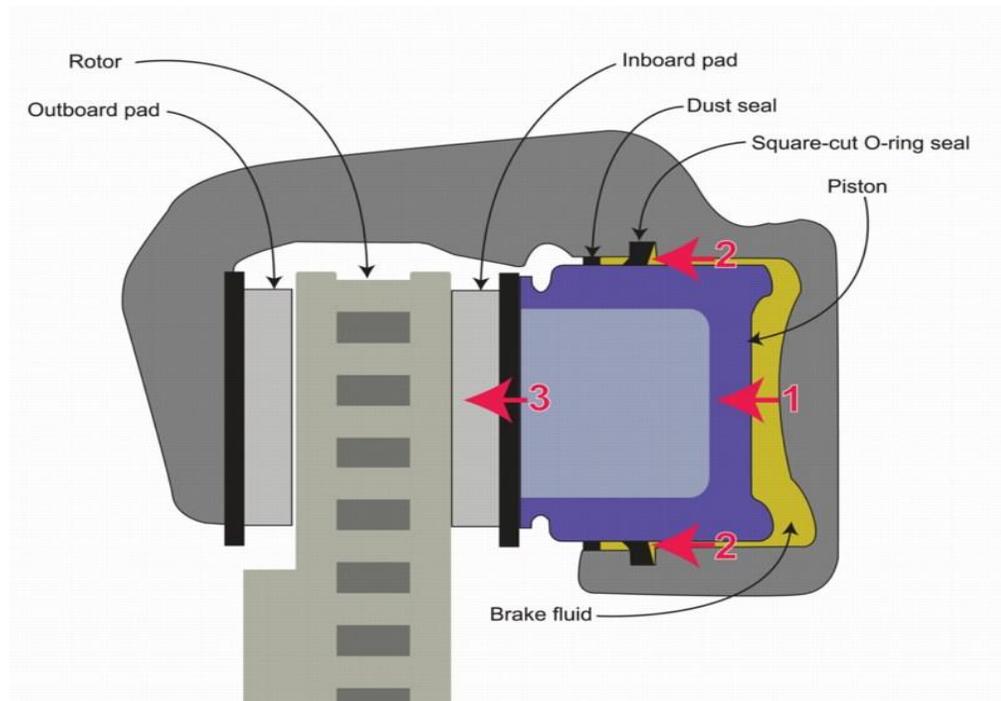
The outer pad wear that cause of clamping pressure variation [43]
